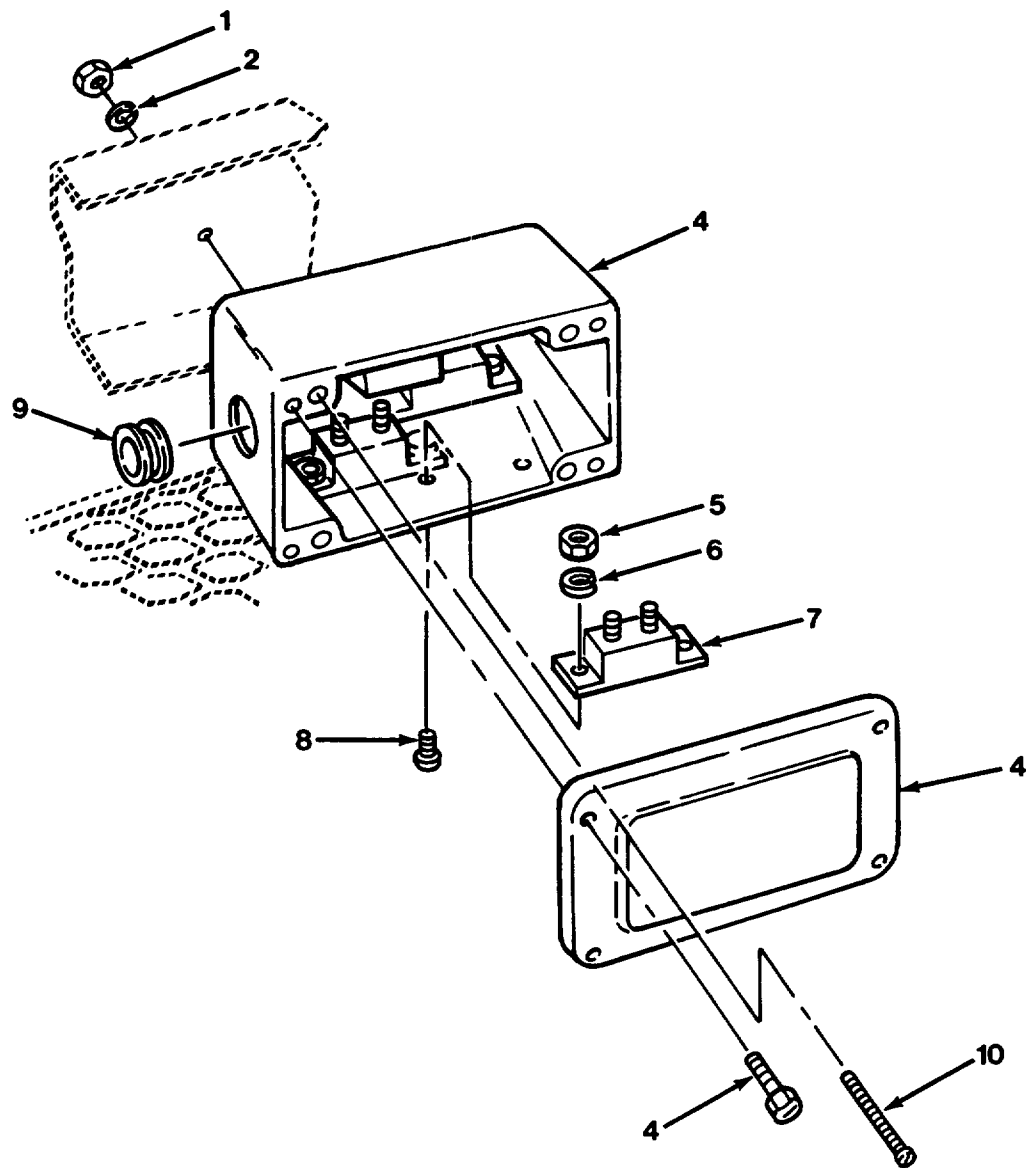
CIRCUIT BREAKER BOX ASSEMBLY
